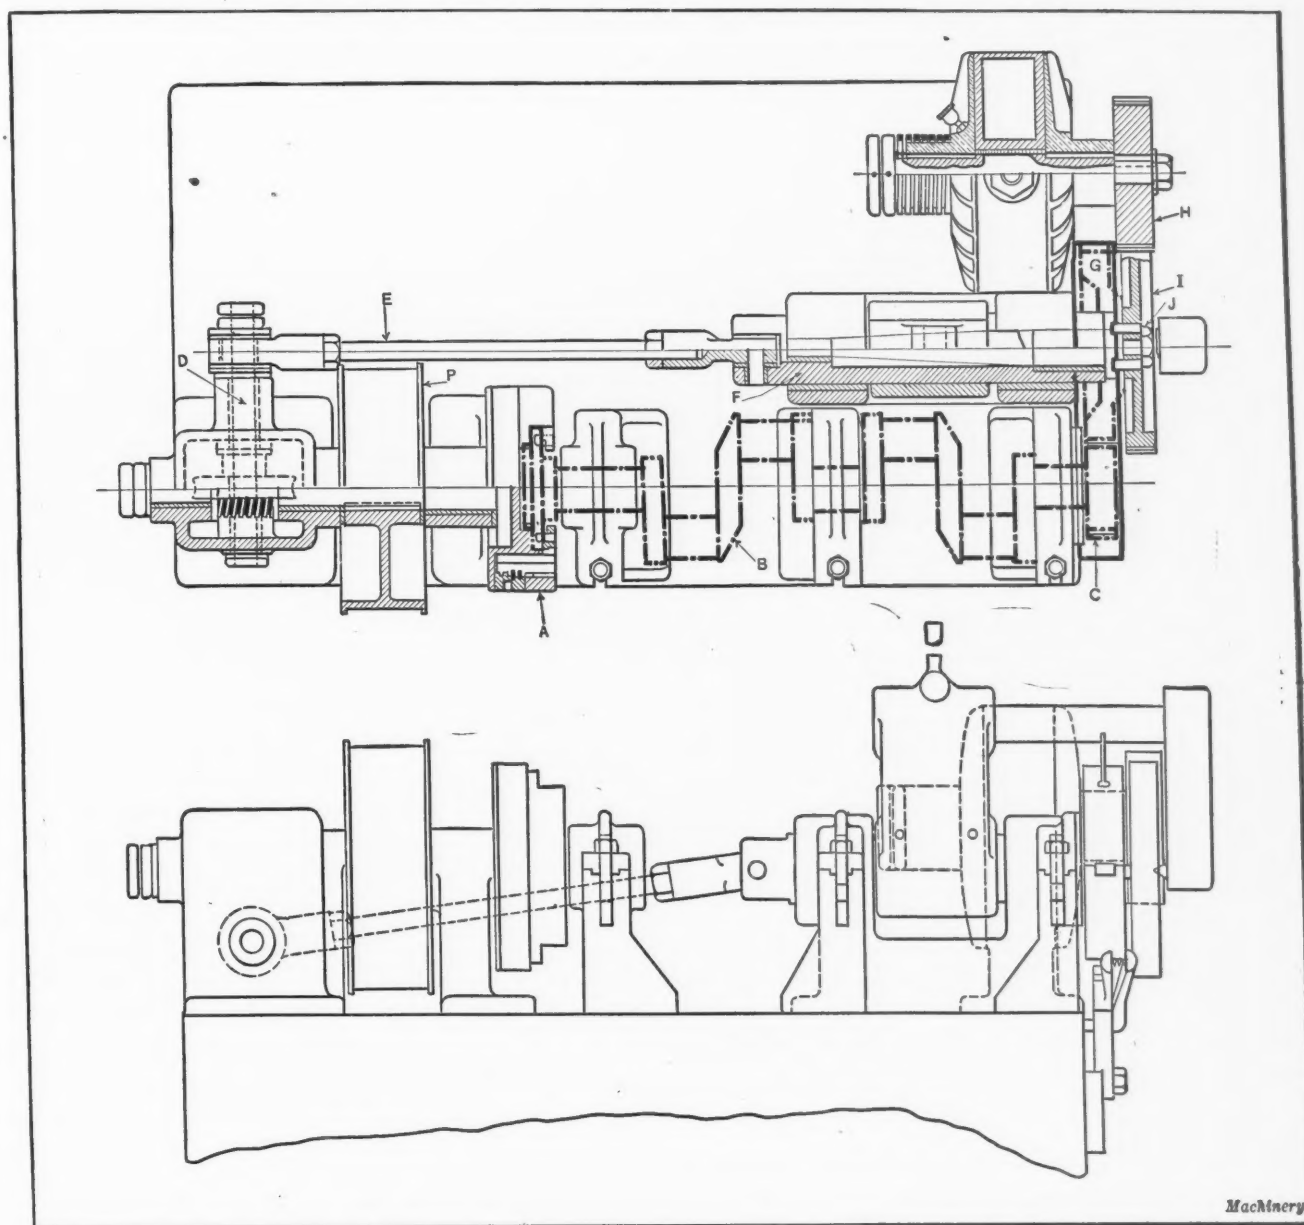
Machine in which Timing Gears are lapped by rubbing the Teeth of Two Gears together with an Abrasive
